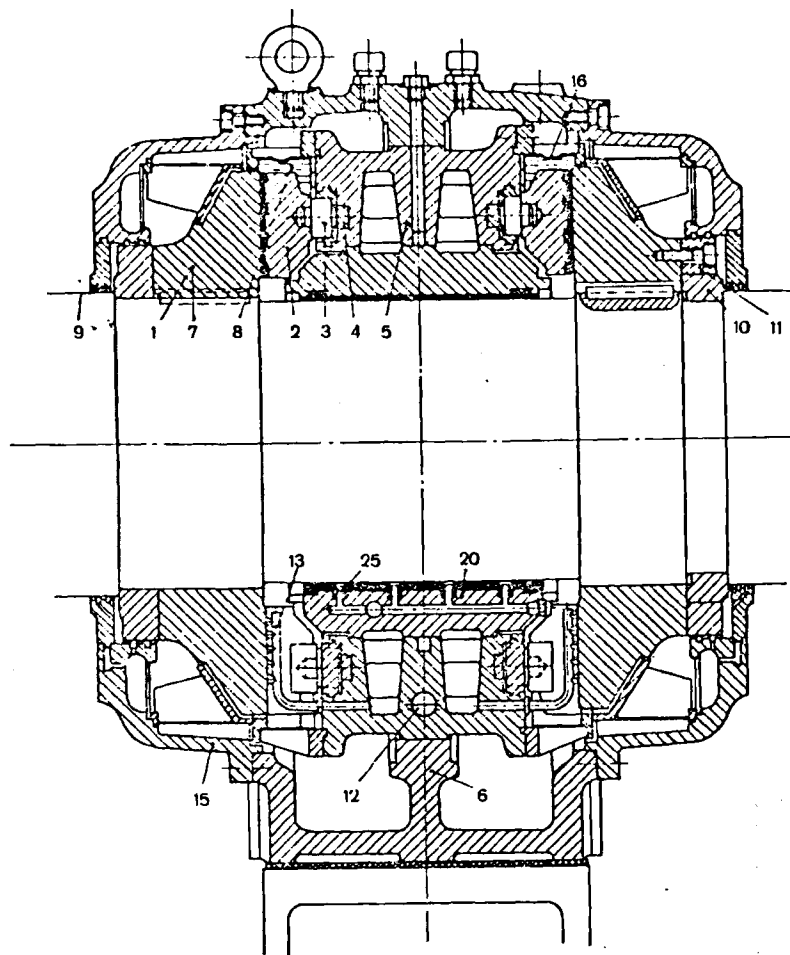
Guide bearing with two axial (thrust) bearings for, e.g., a FT with horizontal shaft. Oil circulation of the thrust bearing by a pump feeding a ring pipe 12, with radial branches, blowing out the oil against the rotating thrust collar 1. For a starting lift by pressurized oil from the bore 25. 1 rotating thrust collar, 2 tilted pad, 3 prop with calotte to support pad, callote pressed in mild iron ring, 5 spacer cage of pads, 6 pedestal of bearing, cast iron, 7 driver for 1, 8 oil level, 9 shaft, 10 split support ring, 11 fastening ring for 10, 12 pipe connection for fresh oil, 13 injection pipe, 15 oil pan, 16 overflow edge, 20 bearing sleeve, 25 bore for pressurized oil during start.
